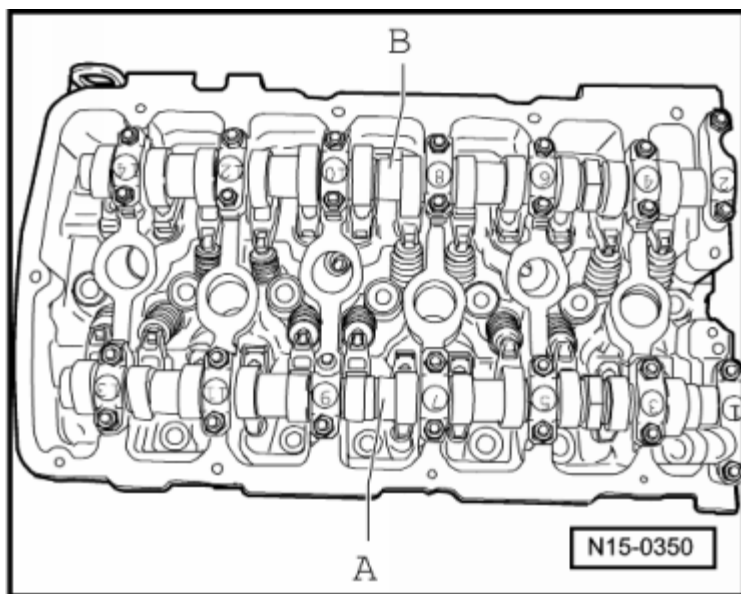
Identifying Intake Camshaft And Exhaust Camshaft
